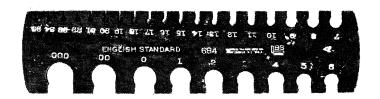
Rolling-mill gage. For gaging iron wire and hot- and cold-rolled sheet steel. The standard dimension for each gage size is the distance between the parallel surfaces. (*Brown and Sharpe*.)
